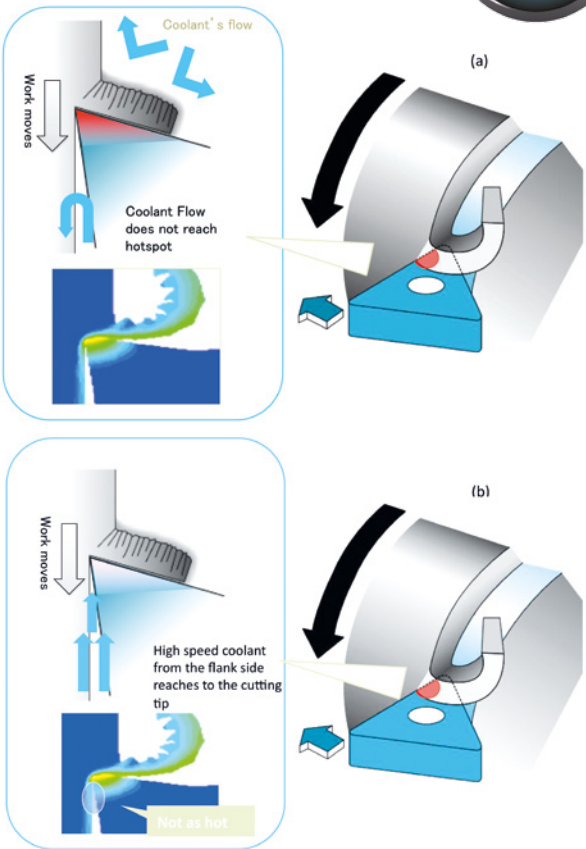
Typical Cutting Bits Coolant Spray and good hot spot cooling (b) versus bad (a)
